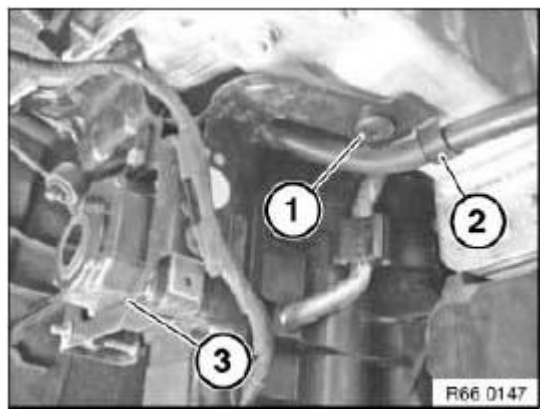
Identifying Night Vision Camera, Screws And Tube
